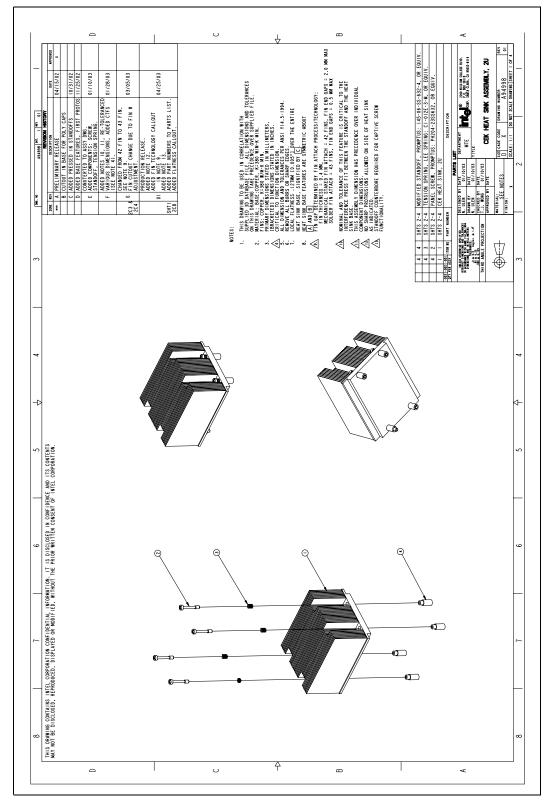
2U CEK Heatsink (Sheet 1 of 4)
